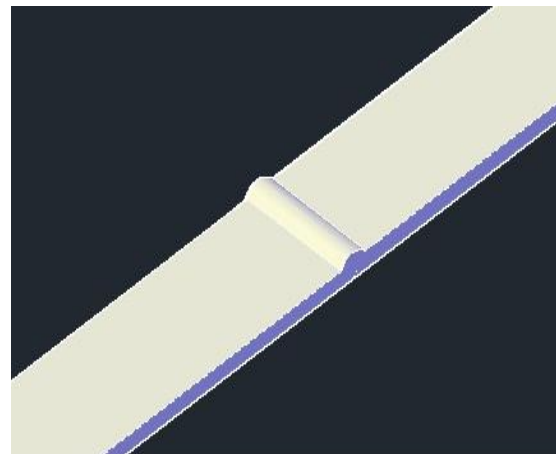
(b) Schematic Dia. of Welding test plate
